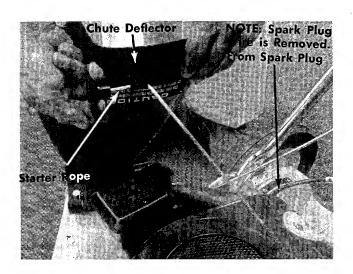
SECURING DEFLECTOR FOR ASSEMBLY
